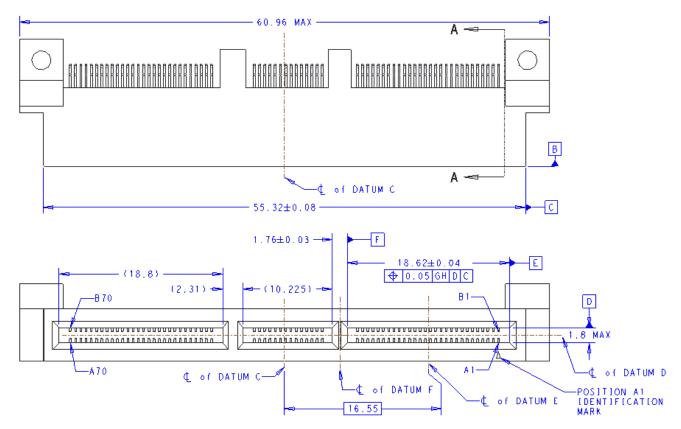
4C STRADDLE MOUNT CONNECTOR DIMENSIONS - FRONT VIEW (MM)
